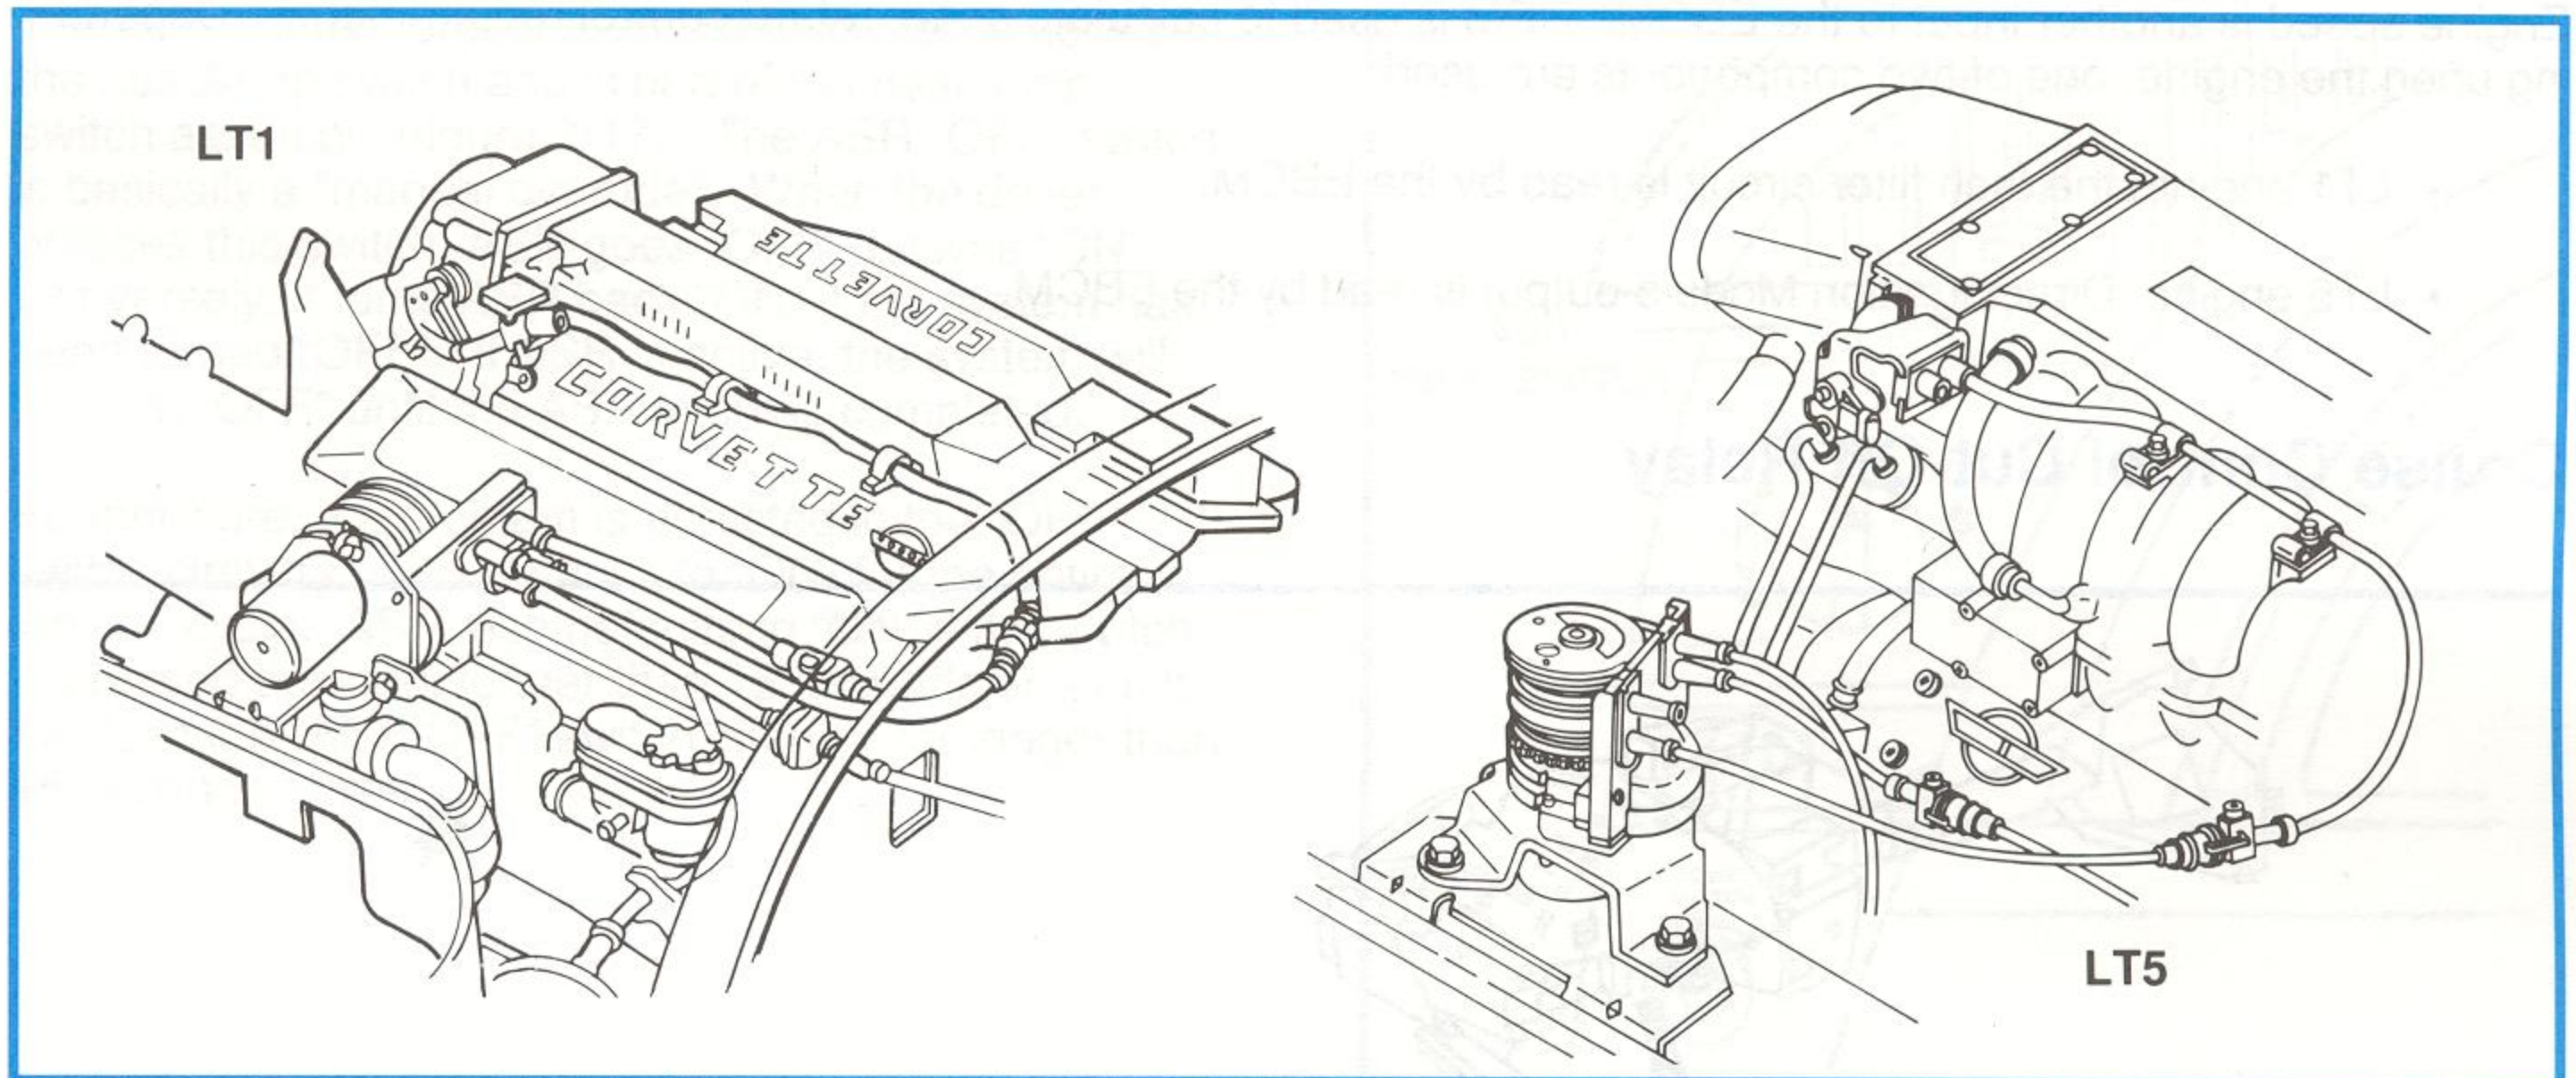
, Adjuster Assembly-Throttle & Cruise Control Cables
